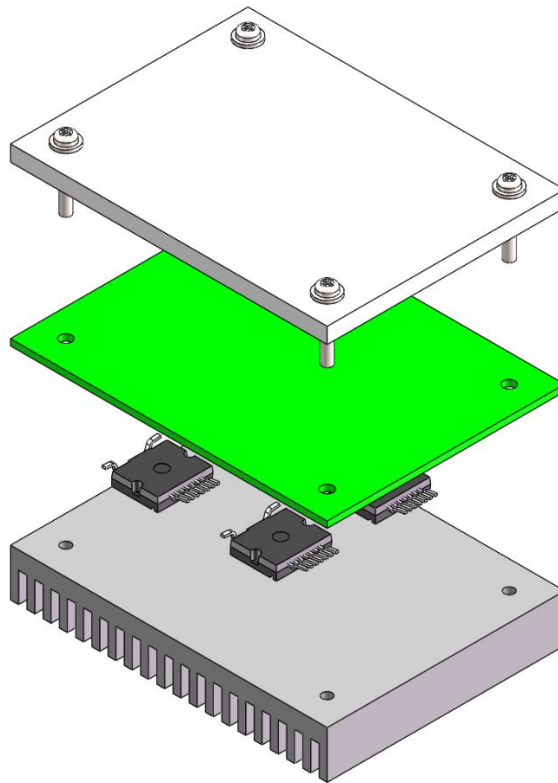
Improved mounting to heatsink using a stiff backplate.
